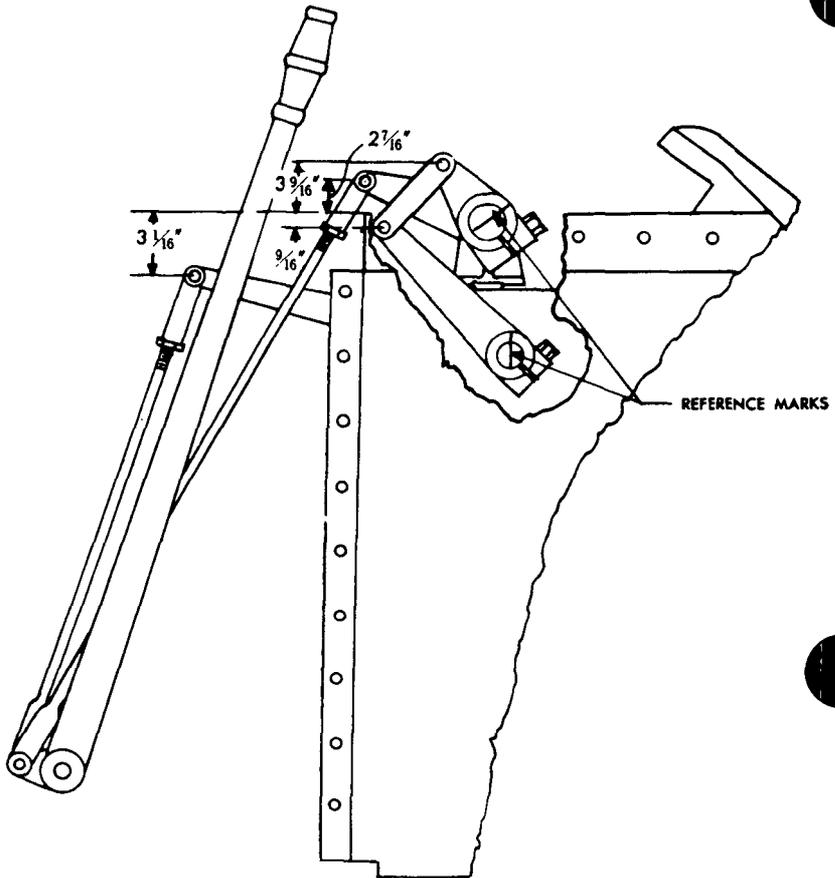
Single-anchor Brake, Three-piece Final Drive Brake Lever Positions
